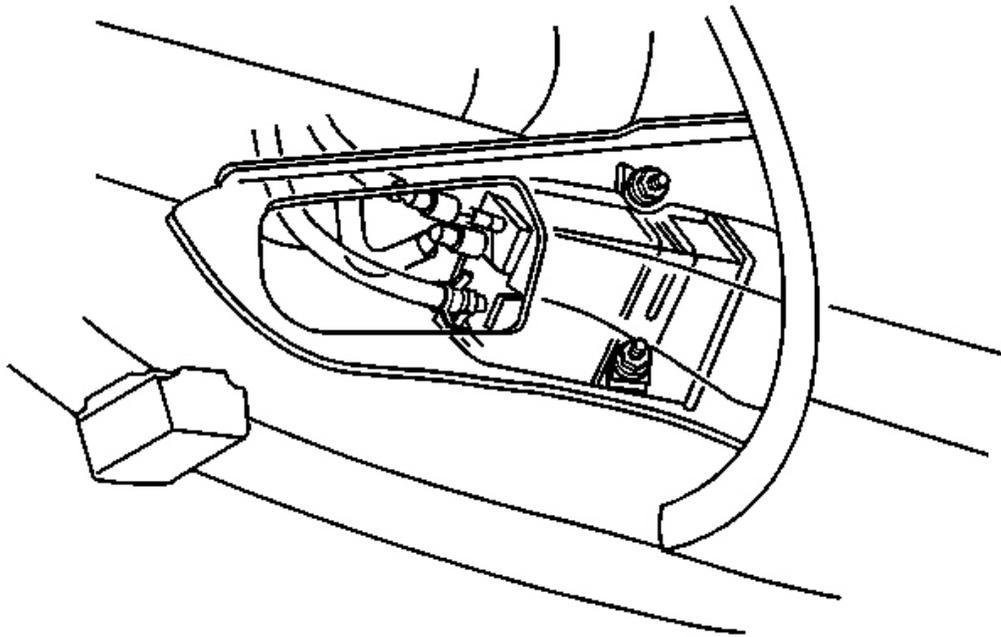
Rear EVAP Purge Pipe & Chassis Purge Pipe
